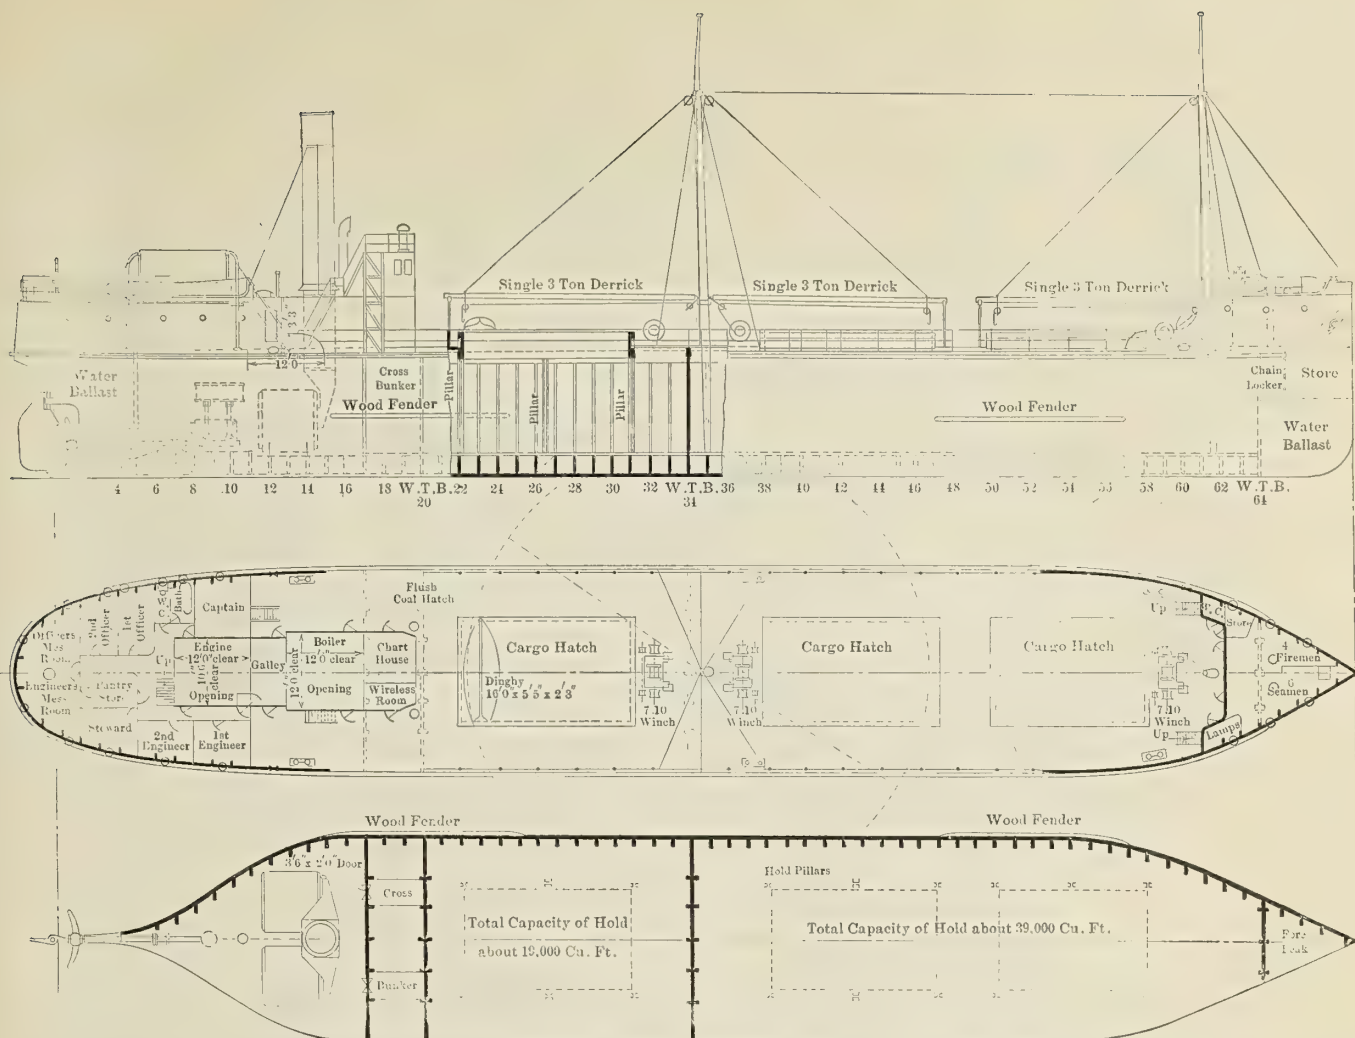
General Arrangement Ferro Concrete Cargo Boat; Length B. P., 205 Feet; Beam, 32 Feet; Molded Depth, 19 Feet 6 Inches
